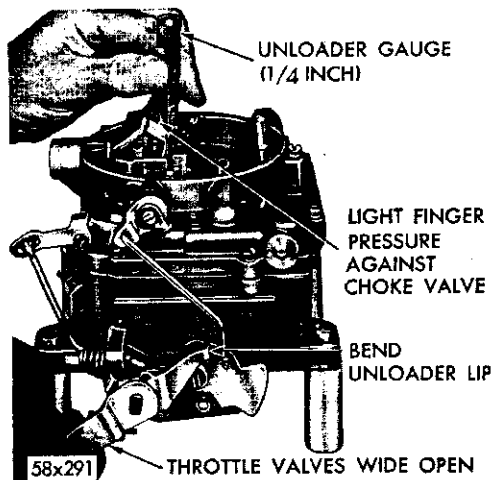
Measuring Choke Unloader (wide open kick) Adjustment
